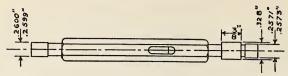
"Go" and "not go" gage for depth of threaded recess, and shank bore,
